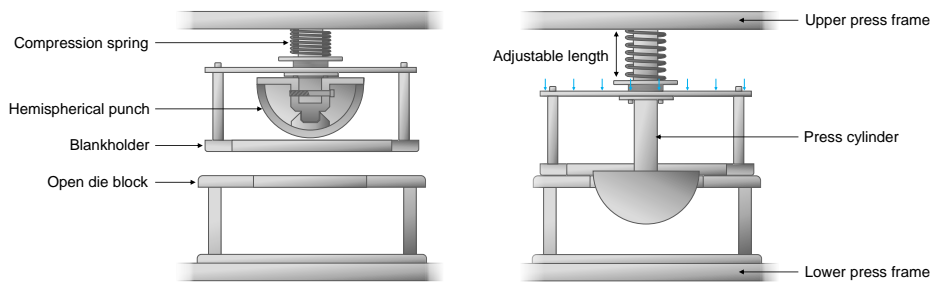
Hemispherical test fixture (left: open, right: closed position)
